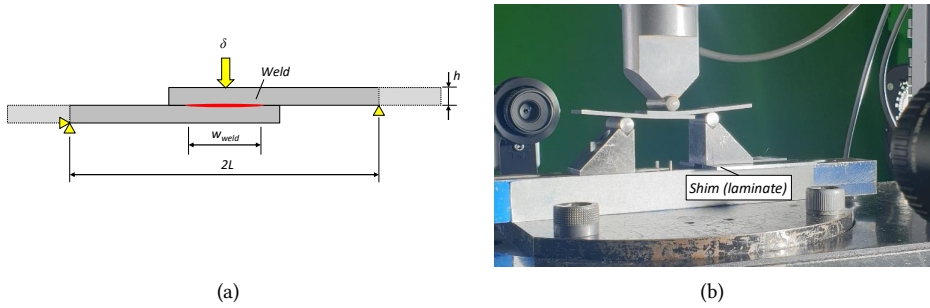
SLS-3PB test at TU Delft: a) Geometrical parameters; b) Test setup with crack monitoring camera and DIC system.
